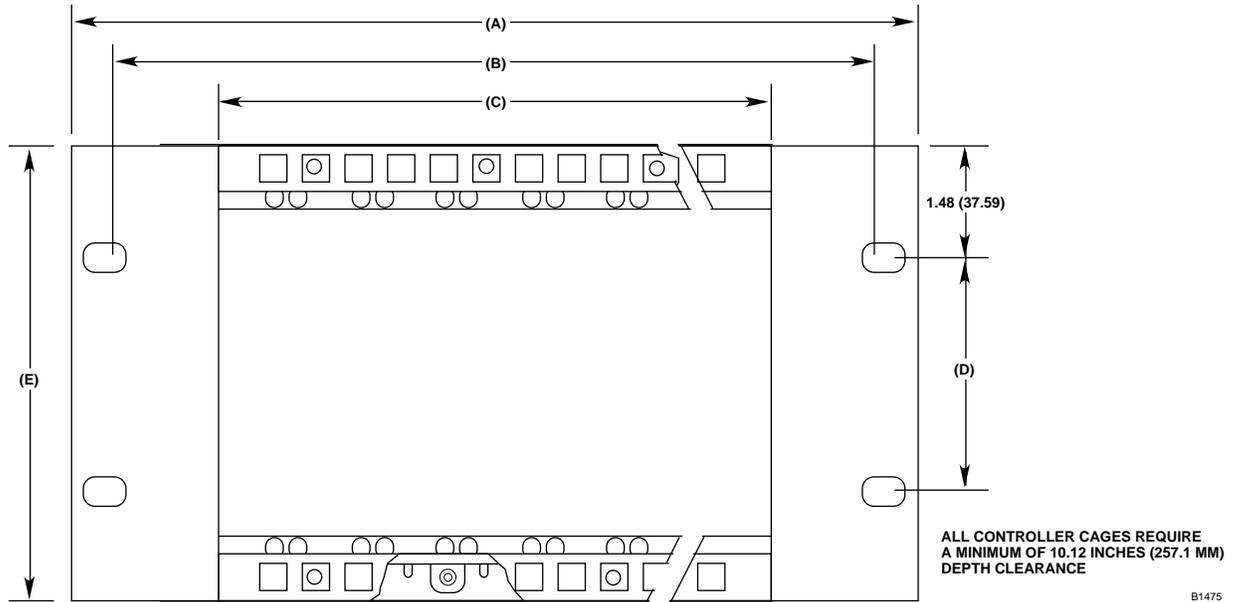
Q4004 Mounting Cage Dimensions in Inches (Millimeters)
